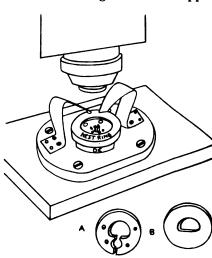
Drawing illustrating design of "flip pers" for keeping die clear of stripped parts
